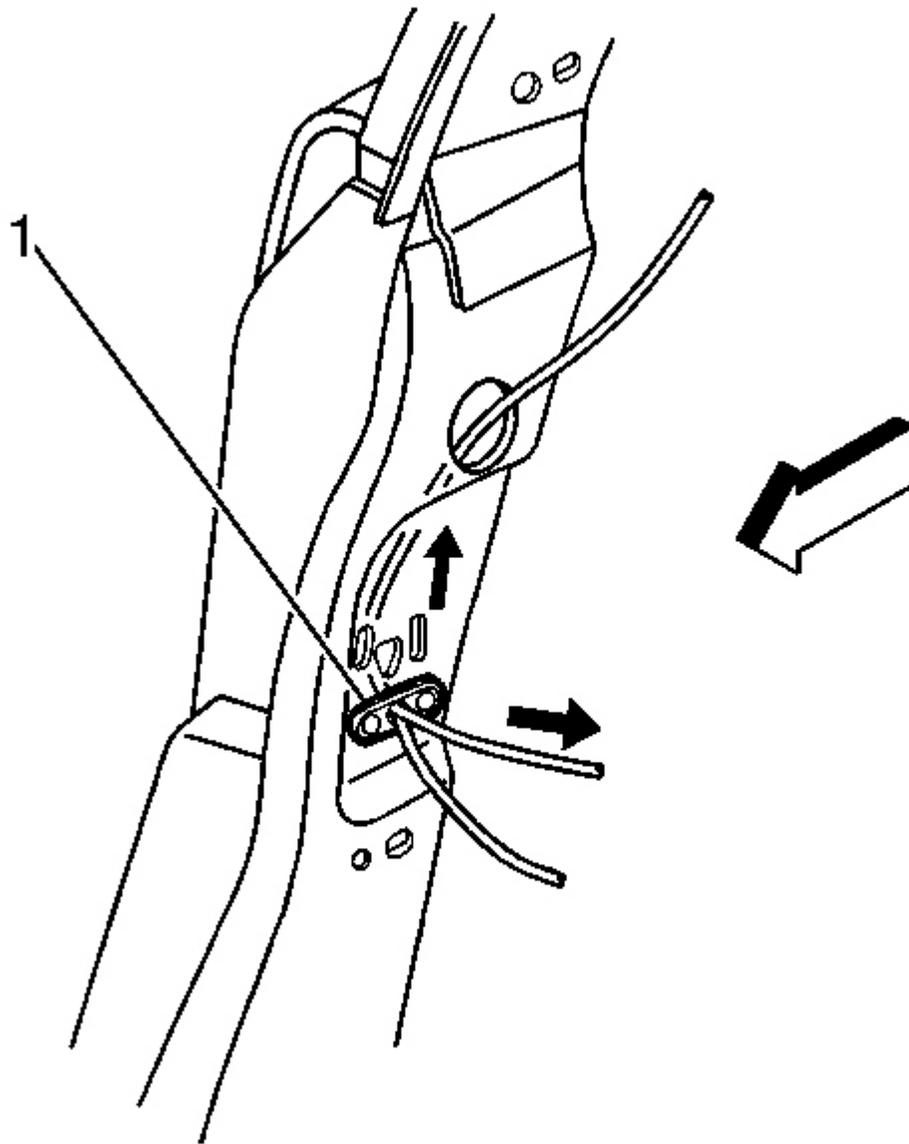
Inserting Hooked Rod Through Anchor Plate Hole
